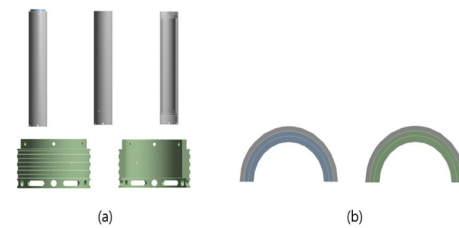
Modeling of flexible protection tube and flange: (a) side view (b): floor plan
